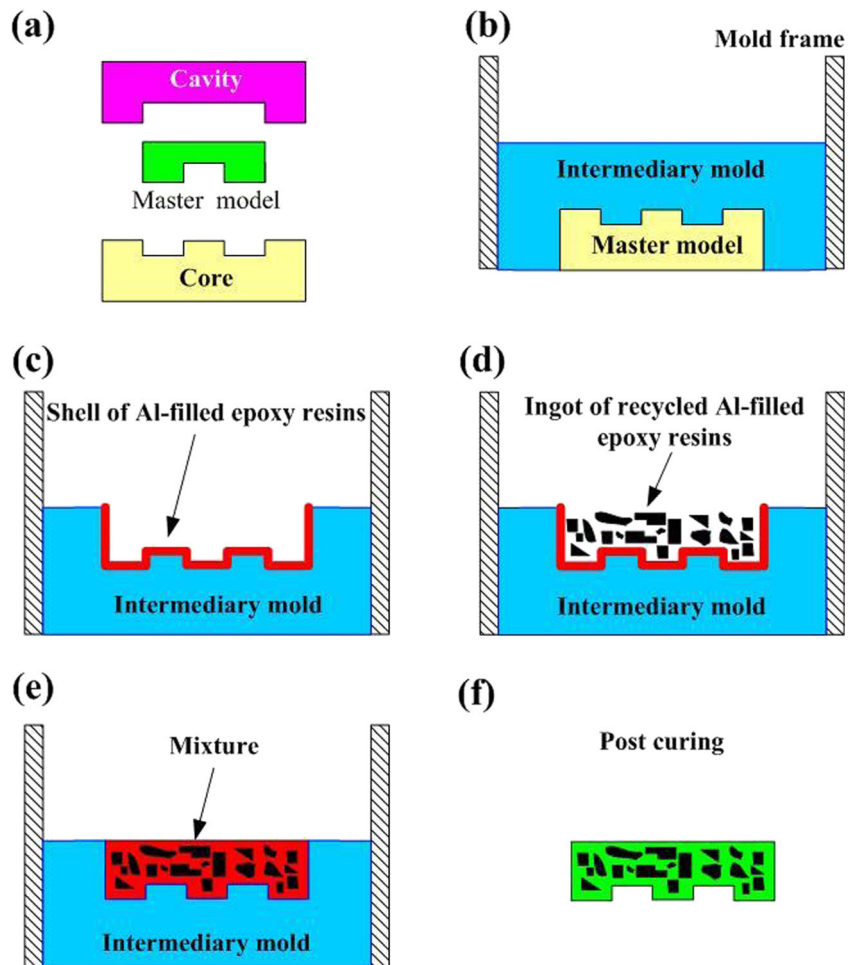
Process layouts for fabricating a large injection mold tooling with conformal cooling channels
